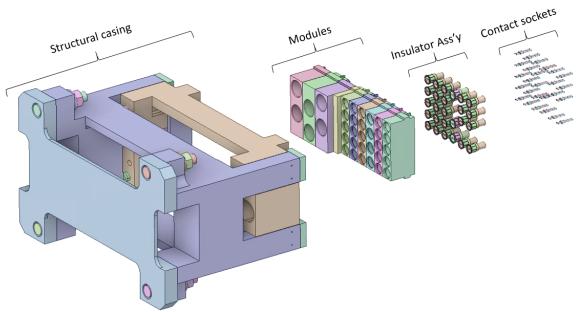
Sub-assemblies which DSM female connector assembly is composed of
